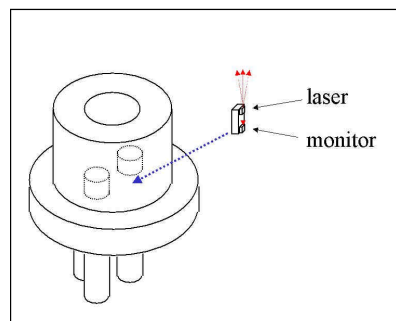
Edge emitting laser subassembly mounted in TO-can.
